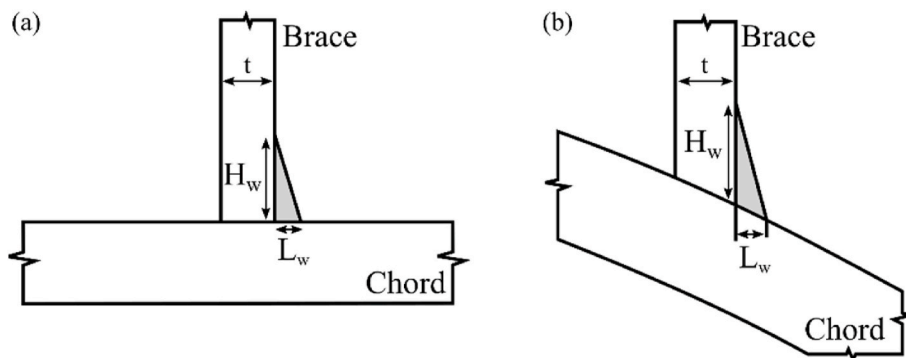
Weld dimensions at (a) crown and (b) saddle locations [12].
